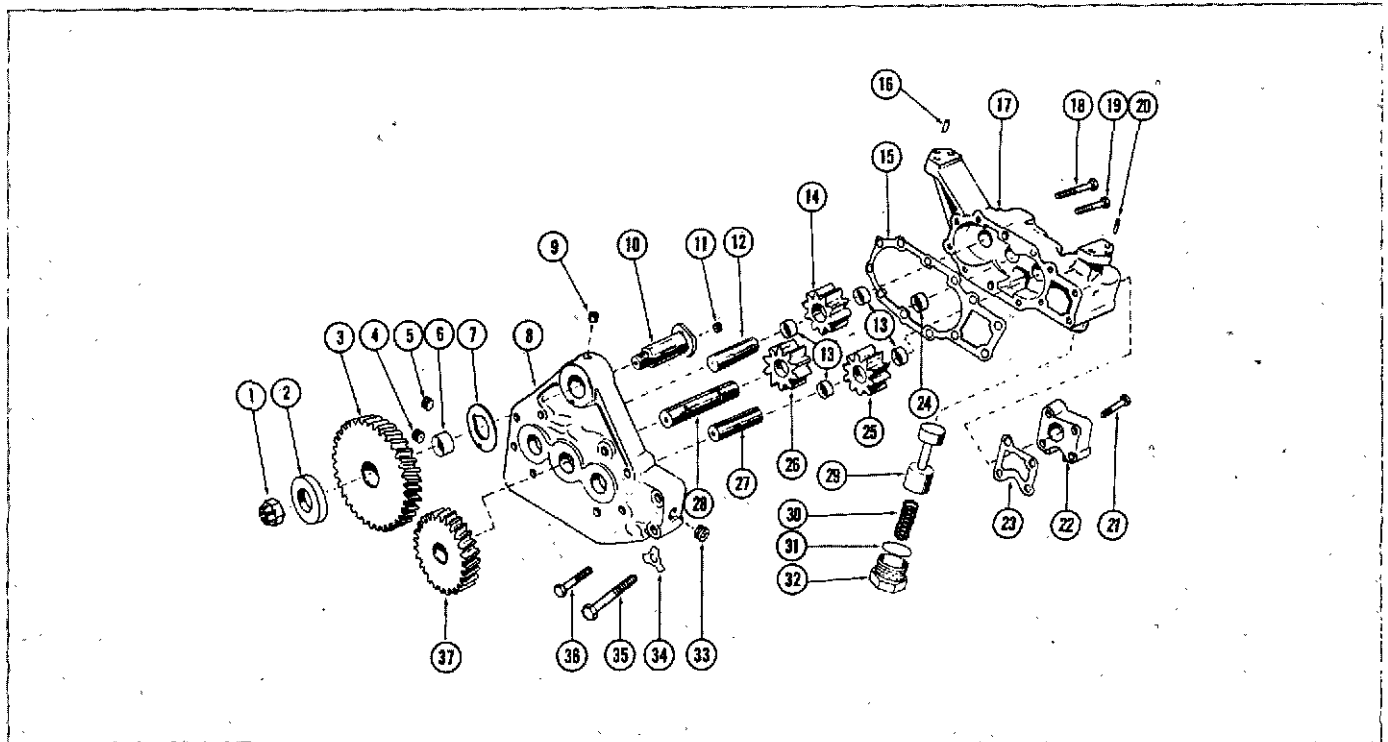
, V40729. Lubricating oil pump-exploded view
